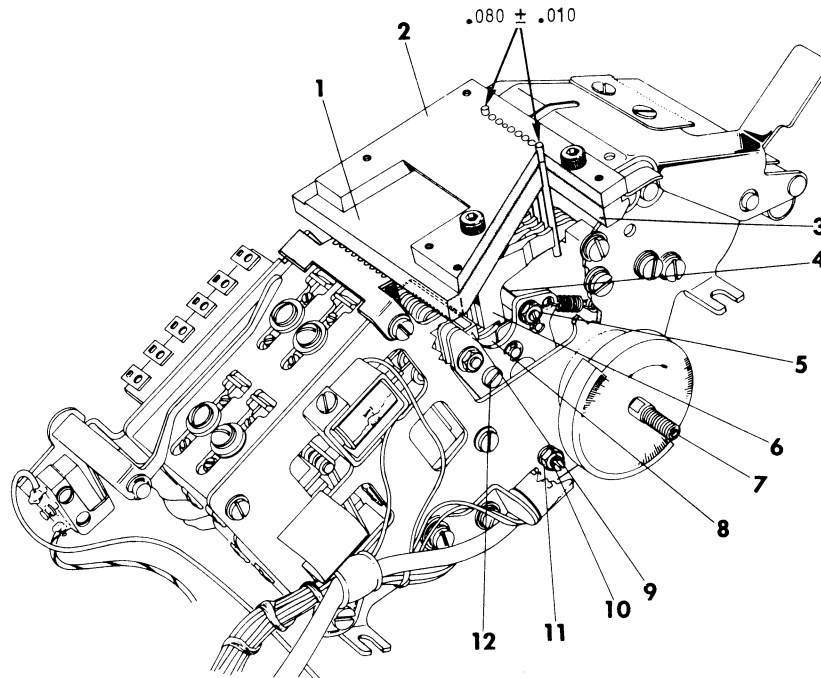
Punch Assembly (Reprinted with permission of Royal Typewriter Company, Inc., A Division of Litton Industries; all rights reserved.)
